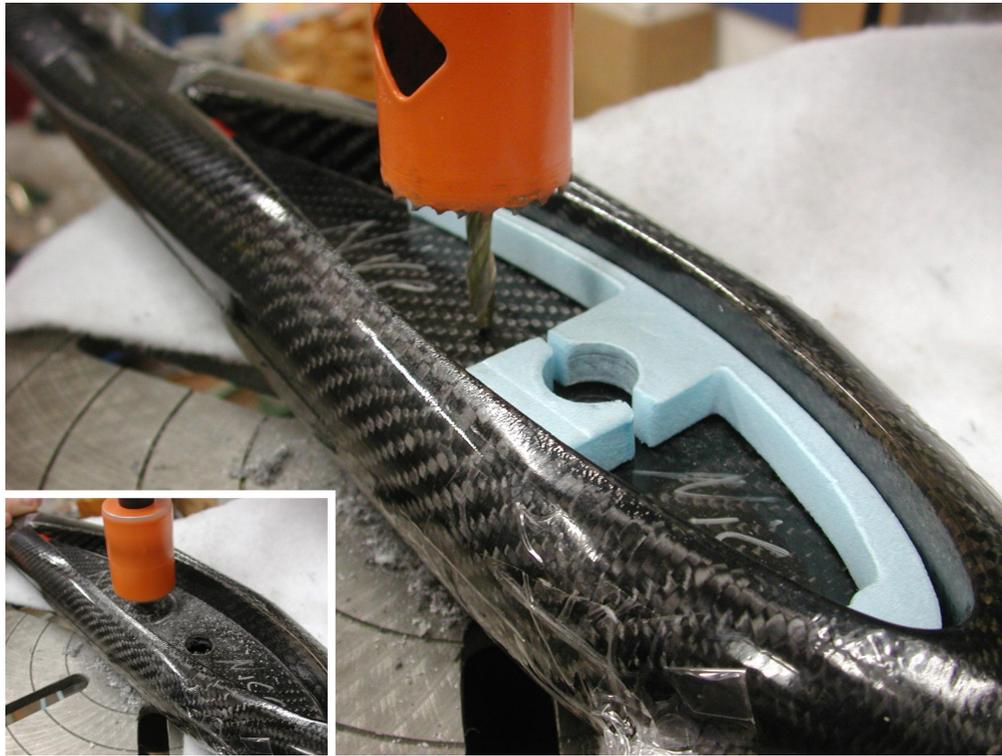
Wire Access Hole Marked and Drilled – detail view bottom left.
